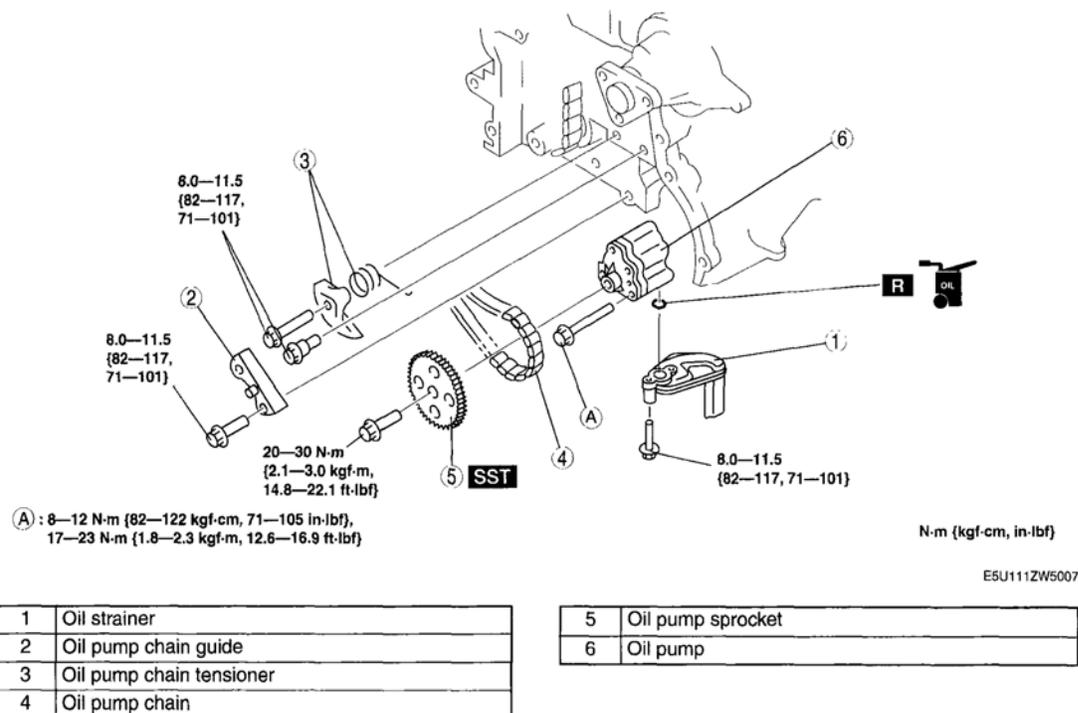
Identifying Removal Order Of Oil Pump (With Torque Specifications)
